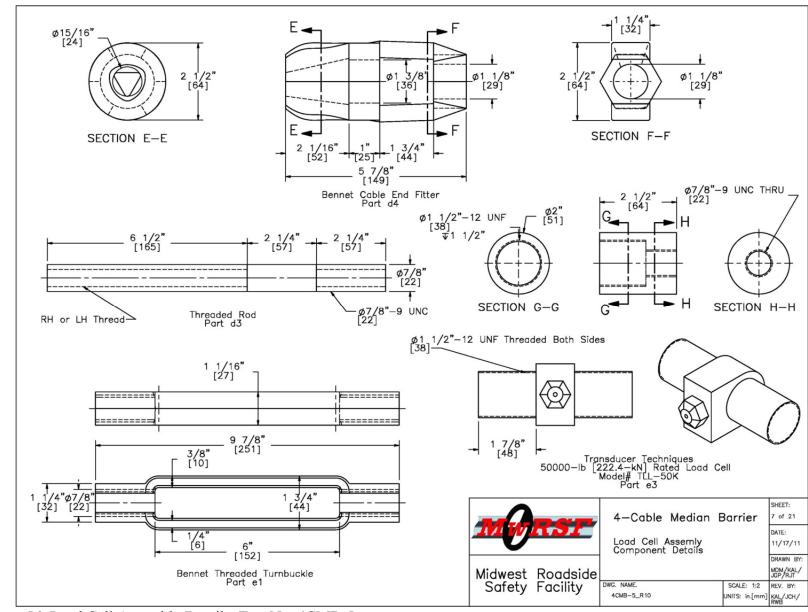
Load Cell Assembly Details, Test No. 4CMB-5
